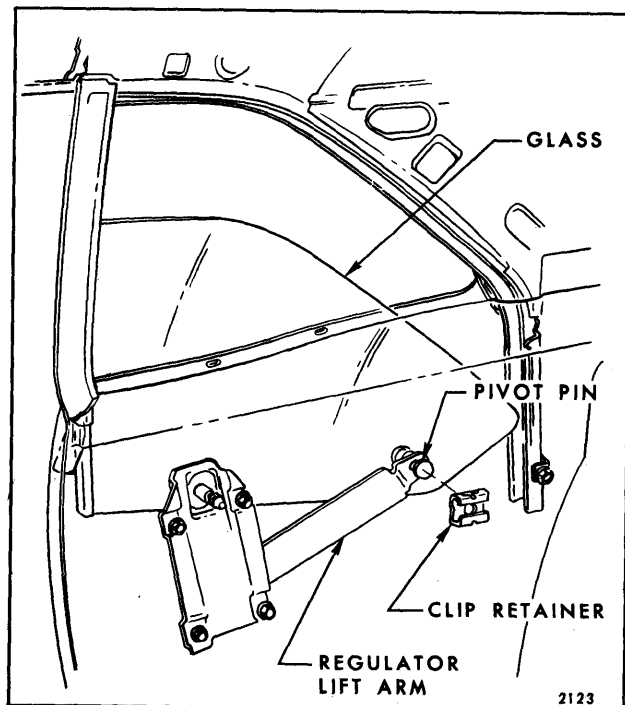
Rear Quarter Window Attachment - "A" Closed Styles Shown - "X" Typical
